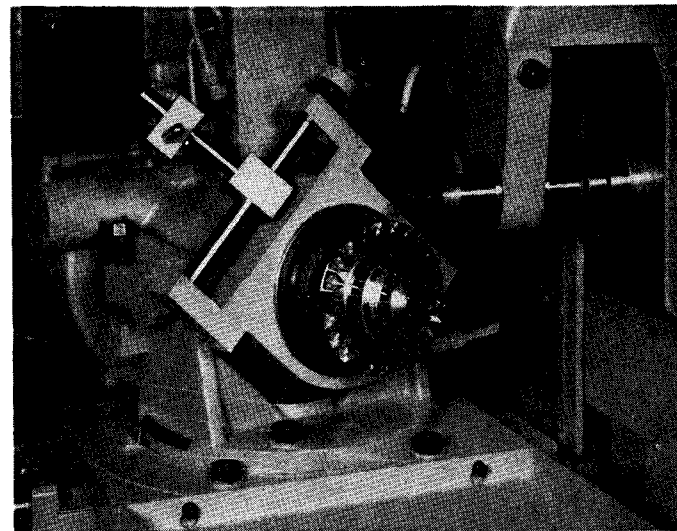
Indexing fixture for the machining of rock-bit drill head used in the drilling of oil wells. (The Cincinnati Milling Machine Company)
